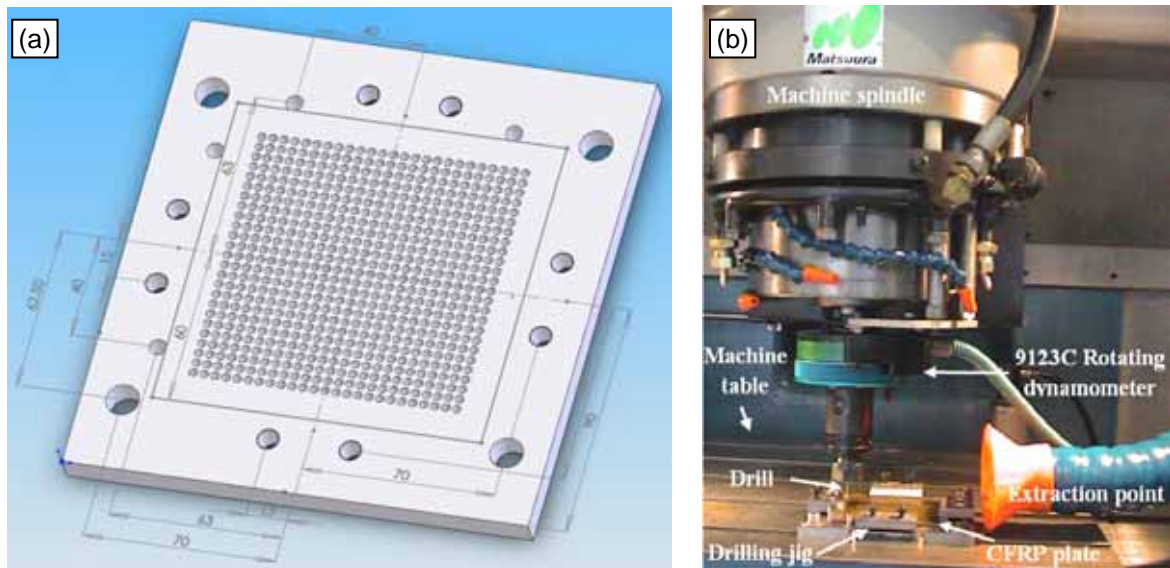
(a) Drilling jig and (b) experimental setup in Phase 1 and 2 testing
